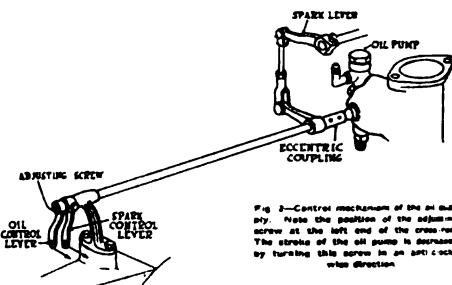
Control mechanism of the oil pump. Note the position of the adjusting screw at the left end of the crank. The stroke of the oil pump is decreased by turning this screw in an anti-clockwise direction.
